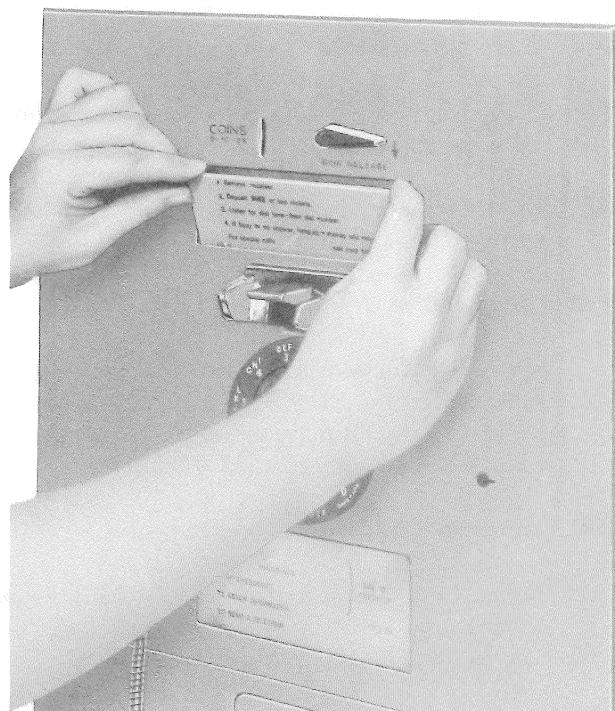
Installing Instruction Card in 2-Type Set With P-23F041 Card Spring
